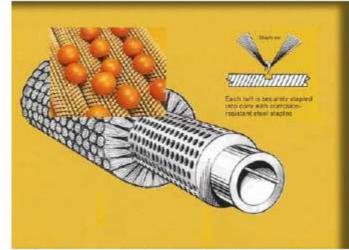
Staple set cylinder brushes (www.industrial-brush.com)
